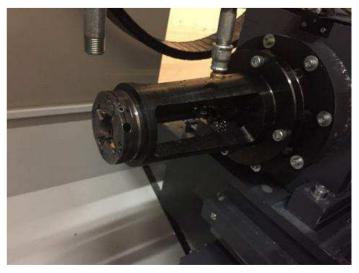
In the machine, the part is tensioned with a feed, then peeled with a 4-blade tool. The tool peels front with 4 plates. Each travels with 0.15 mm feed which gives 0.6 mm per revolution for four plates. Back is still a chamfering tool that does the running for the roles chamfering. He makes a 20 ° bevel. The chamfering must be respectively set manually for different lengths.
